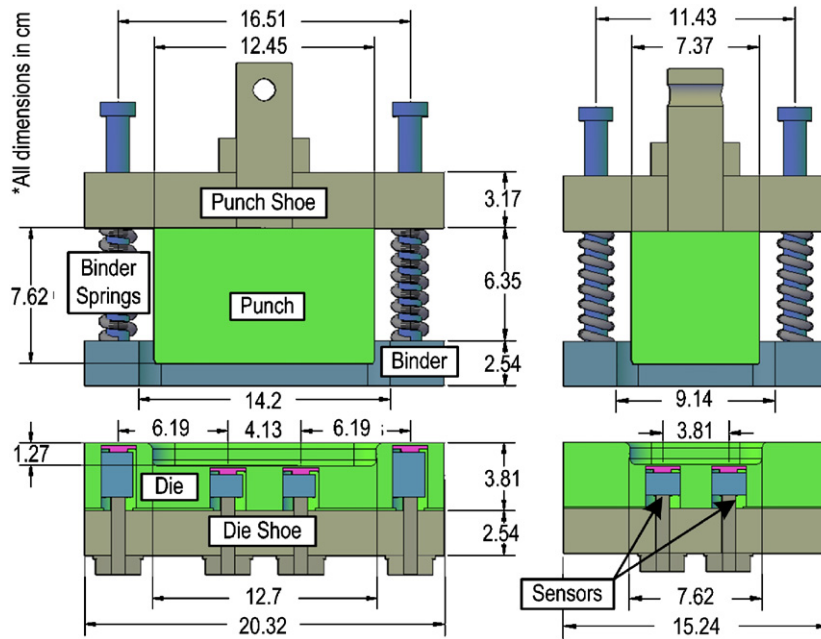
CAD drawing of experimental setup of pressure sensors.
